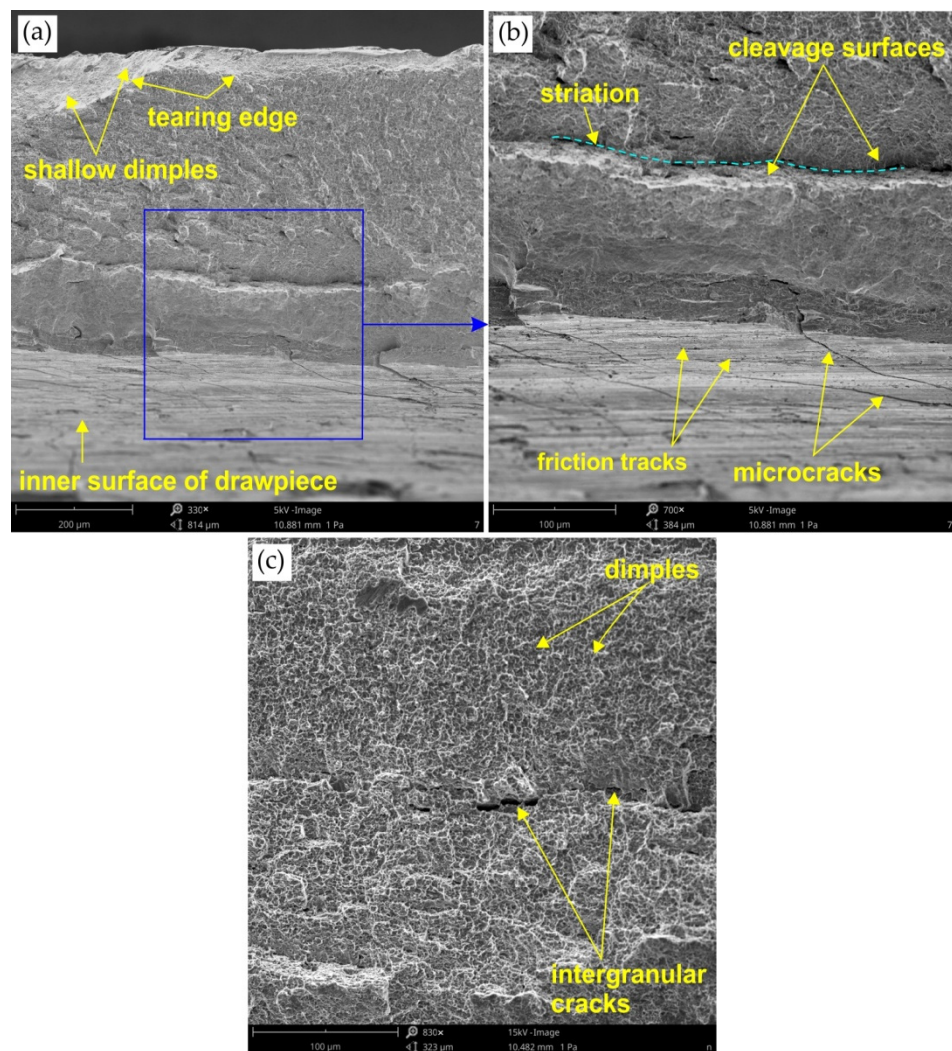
SEM micrographs of the fracture surface of VWACF produced in run 15: (a) cross-section of the fractured surface, (b) view of the near-edge inner surface of the drawpiece, (c) magnification of the ductile fracture area.
